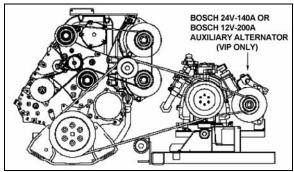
BELT LAYOUT (VIP WITH DDC S60 ENGINE SHOWN) 22342
